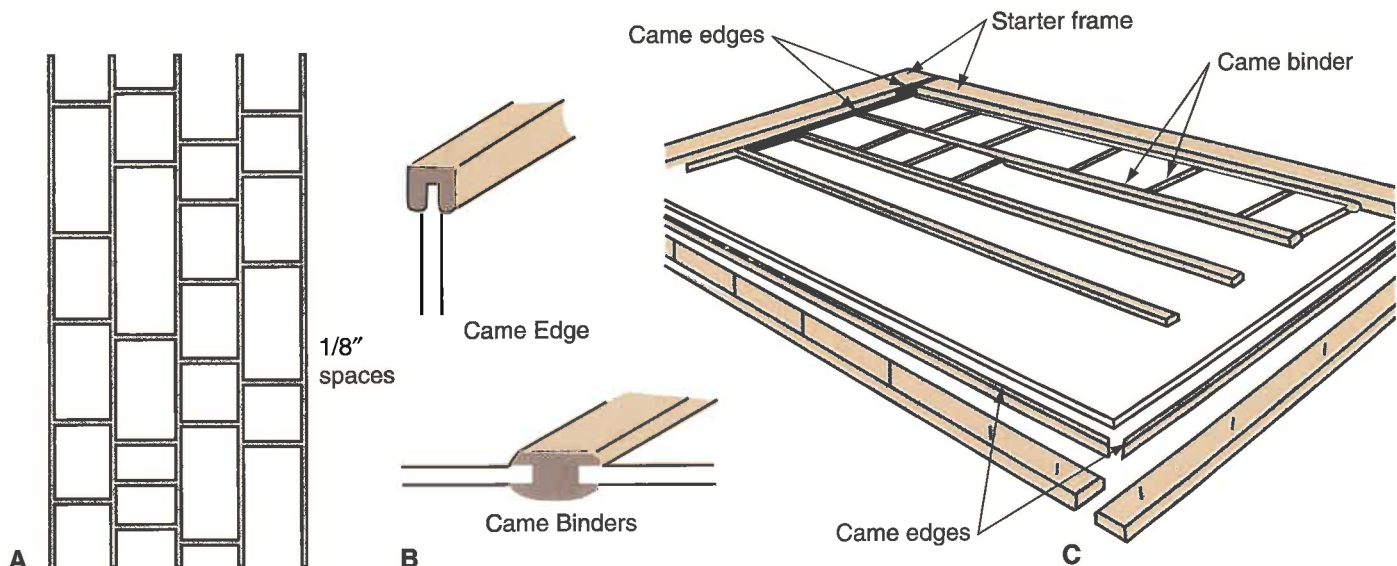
A—The pattern for glass pieces is laid out with space allowance for lead came. B—Lead came fits between glass pieces and on the outer edge of the panel. C—Assemble the panel in a wood frame.
